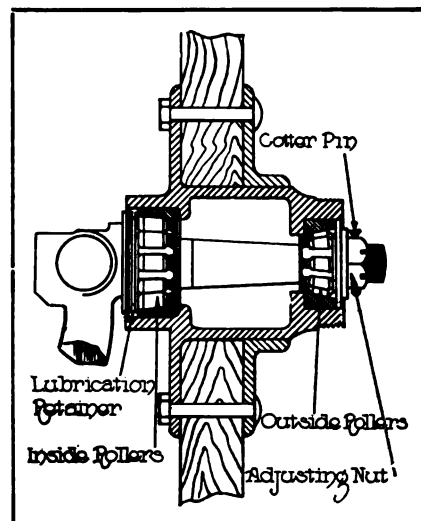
Roller Bearings and Parts Utilized in Adjustment.
